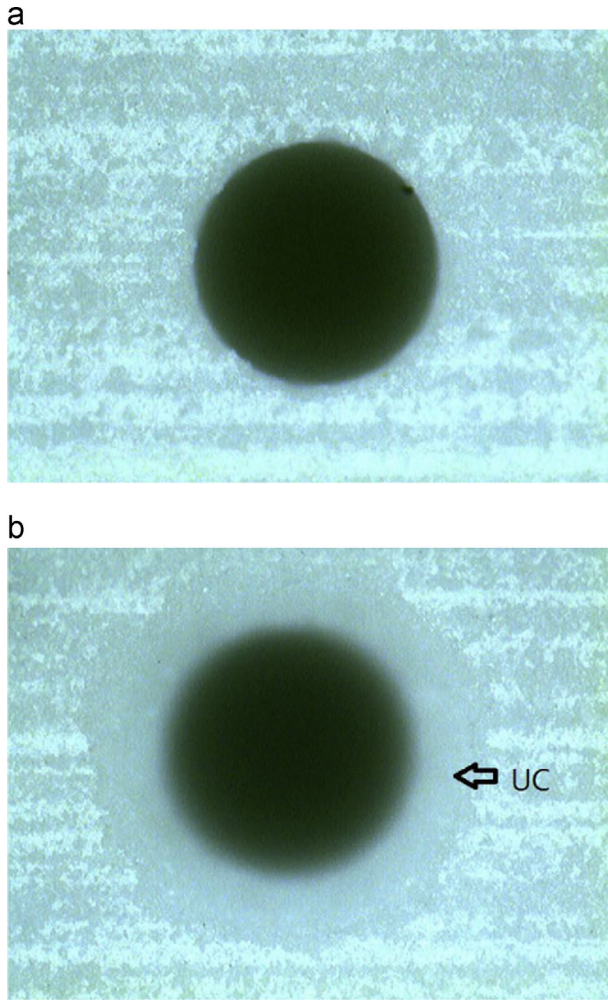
Optical micrographs for the holes formed in sample A by the drill diameter of 100 μm . (a) $R=30,000$ rpm and $V=5$ mm/min, (b) $R=30,000$ rpm and $V=7$ mm/min. UC denotes uniform chipping.
